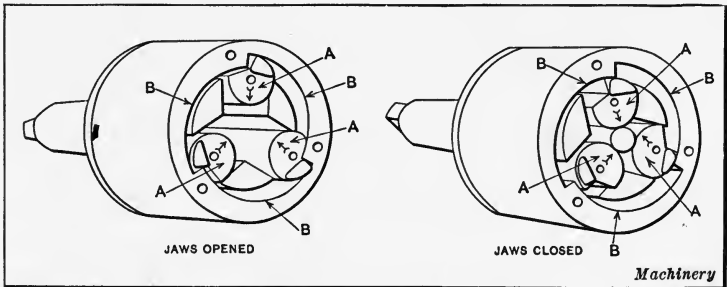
Chuck having Eccentric Rollers which Grip Drill Shank
